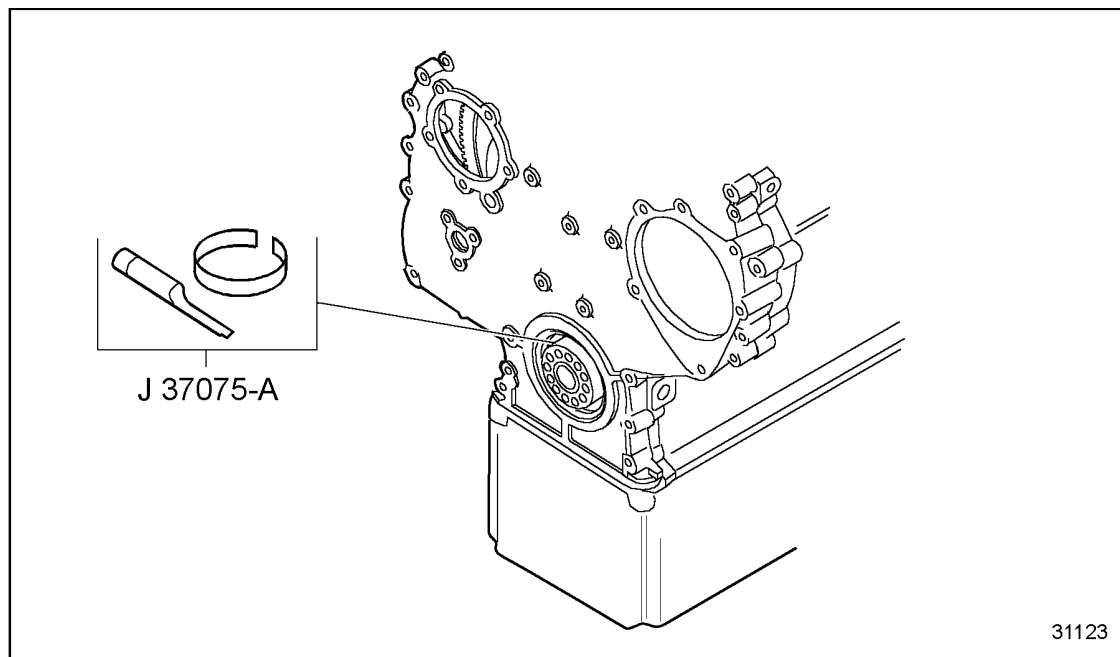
Oil Seal Sleeve Removal Tool for the Federal Mogul Seal
